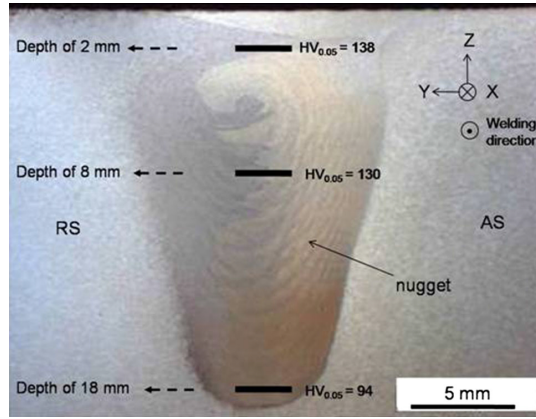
Hardness gradient in the stir zone of thick Al2050 FS weld. From Avettand-Fènoël *et al.* [84].
